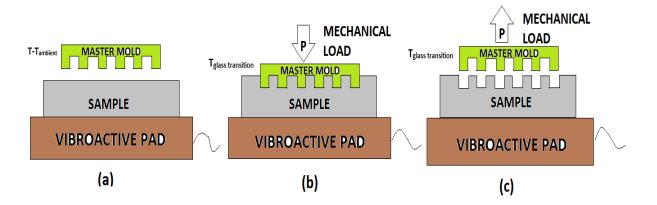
Steps process of hot imprint with connect to ultrasonic excitation a) heating b) imprinting c) demoulding.
